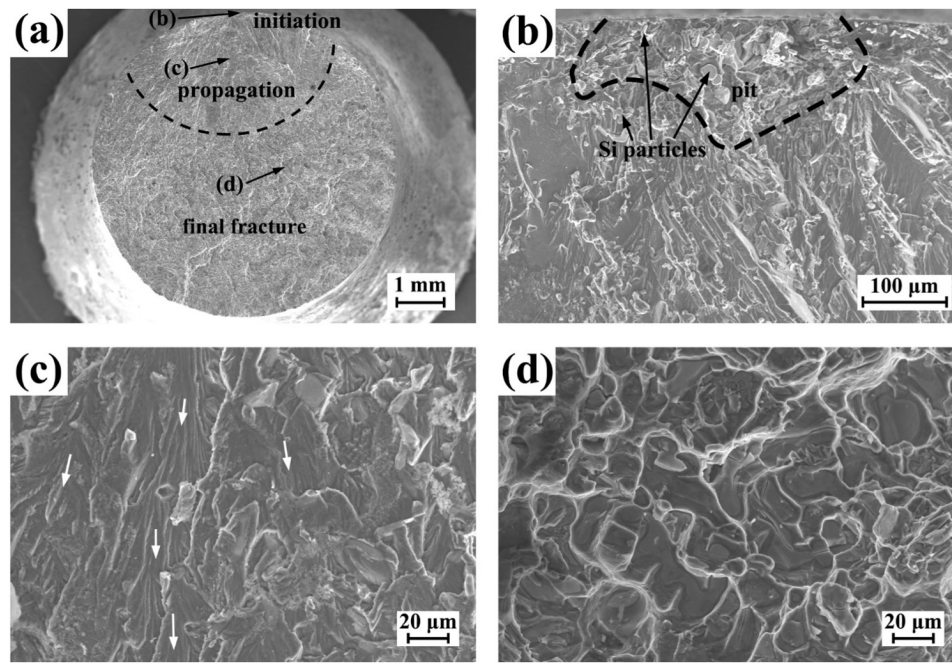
Fracture surfaces of the CF-A360 specimen,  $S_{\max} = 100$  MPa,  $N = 2057,134$ . (a) global view, (b) fatigue initiation, (c) crack propagation, (d) final fracture.
